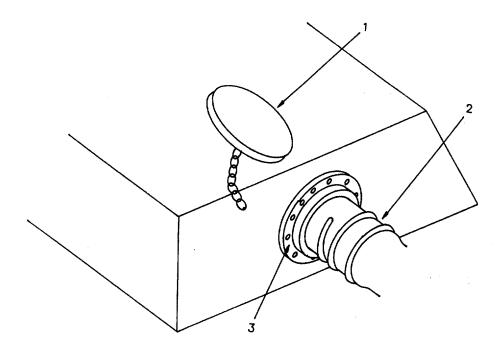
Heater Hose and Heater Inlet Adaptor.
